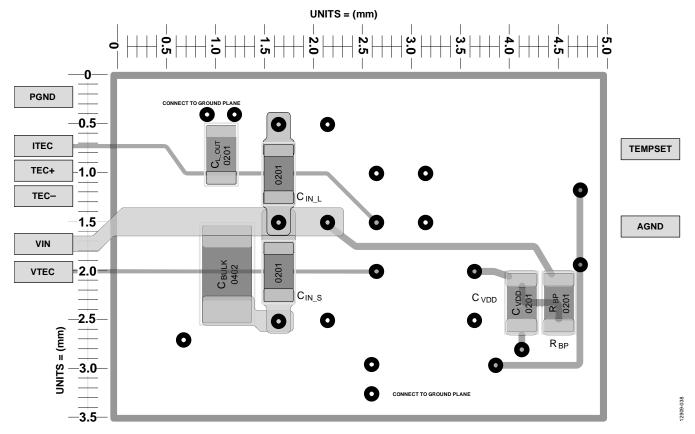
Example PCB Layout Using Two Layers (Bottom Layer Only)
